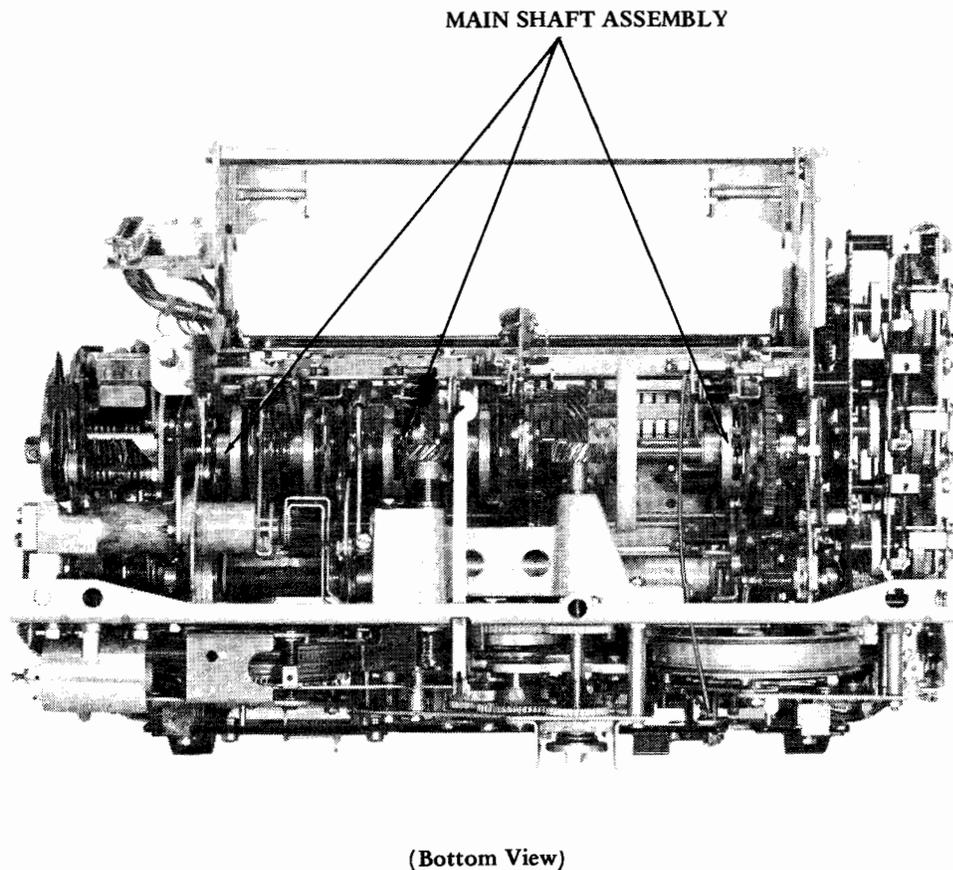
Main Shaft Assembly Mounted in Typing Unit
